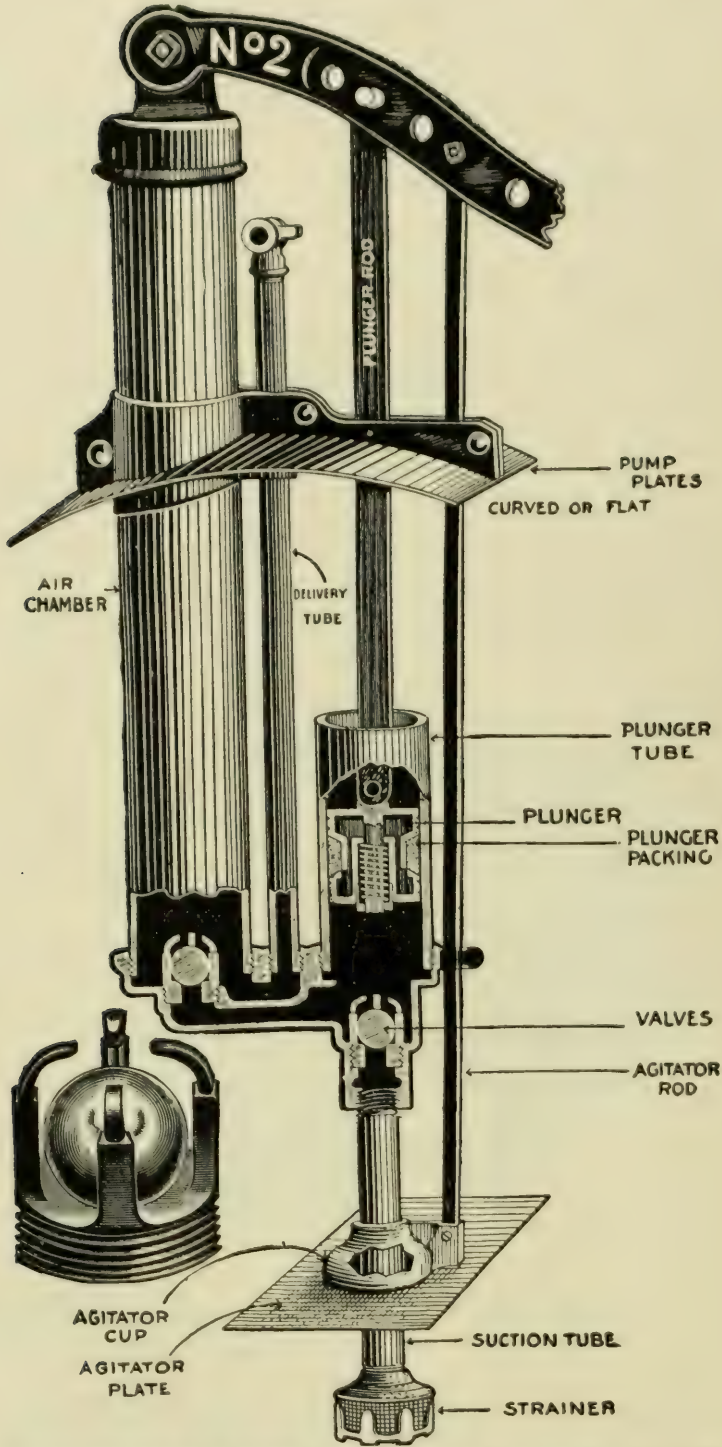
Sectional view of a hand pump to show arrangement of the valves, plunger and packing, and the course of the spray; with the principal parts named. The part labeled plunger tube is better known as the *cylinder*. (From the Spramotor Company.)
